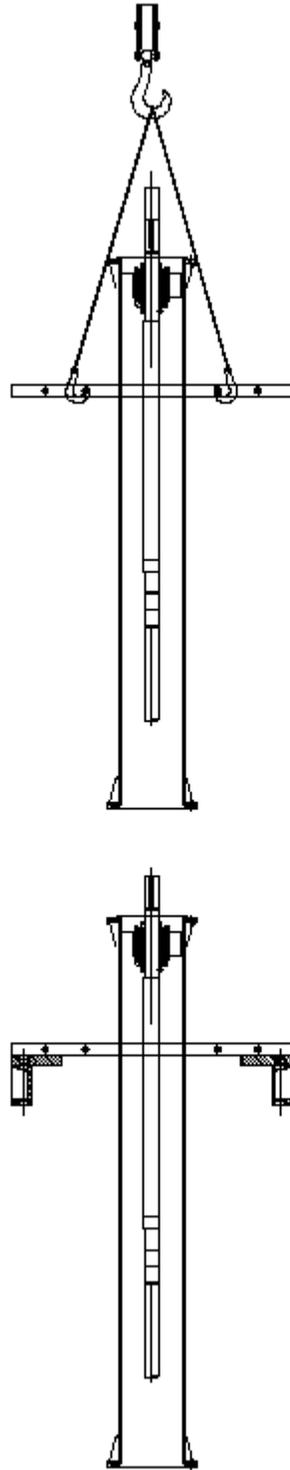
REMOVAL OF COLOUMN ASSEMBLY.
